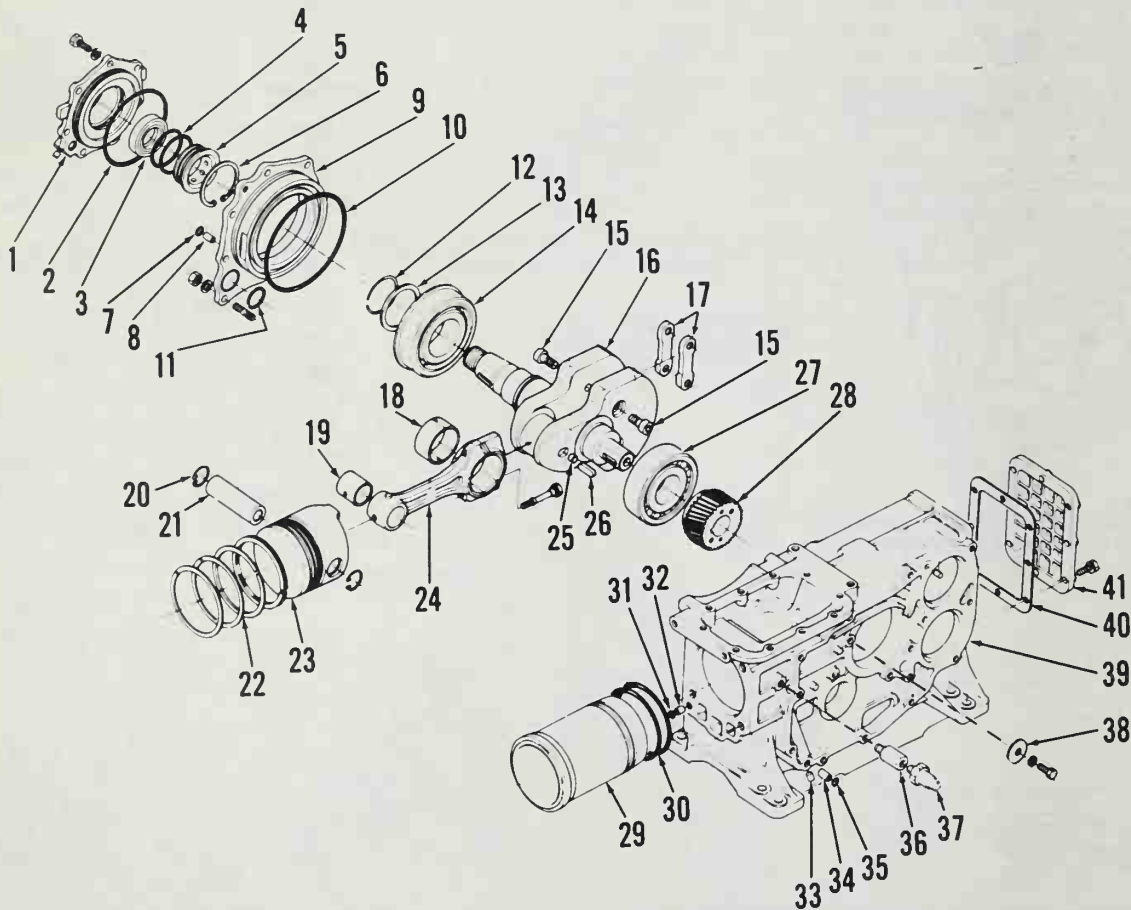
Exploded view of crankshaft, piston, rod and block assemblies.
